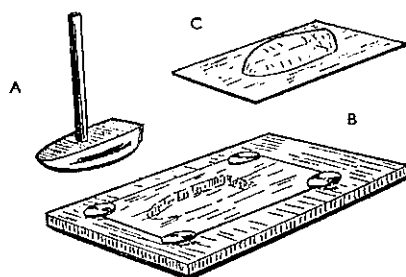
Method of moulding cockpit covers in thin acetate sheet: (a) Mould; (b) Frame; (c) Moulded transparent cover ready for trimming.
